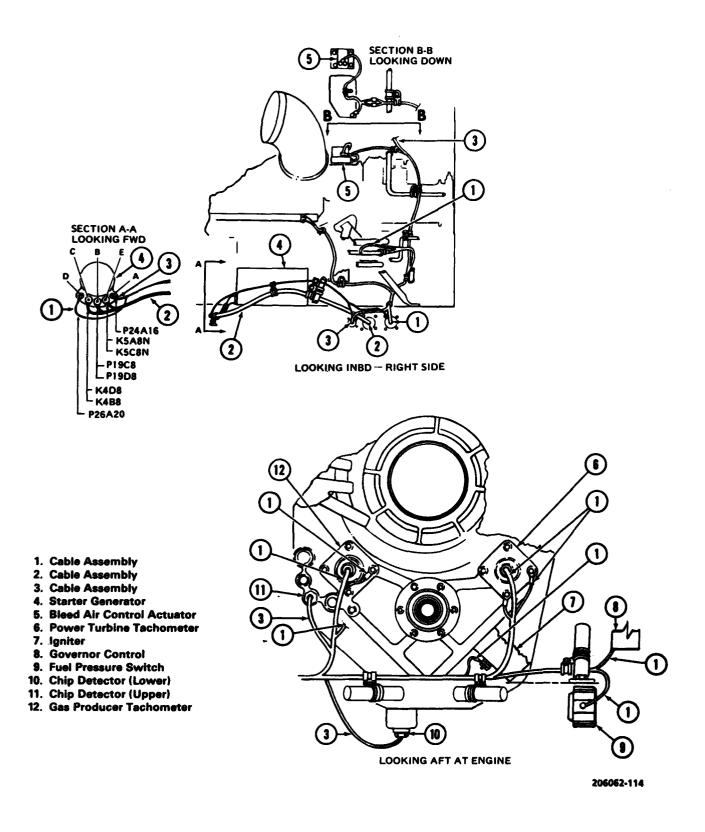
Instillation of Electrical Cable Assembly Engine
